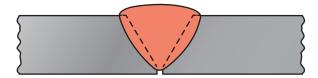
Welding defects with radiographic images. (Continued)
